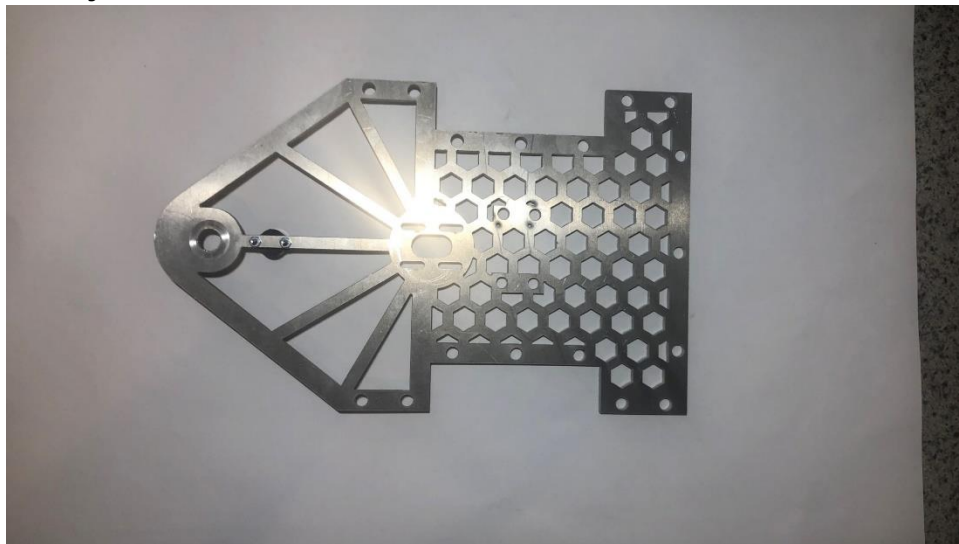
Starting Assembly: Bottom Aluminum Frame, Caster
